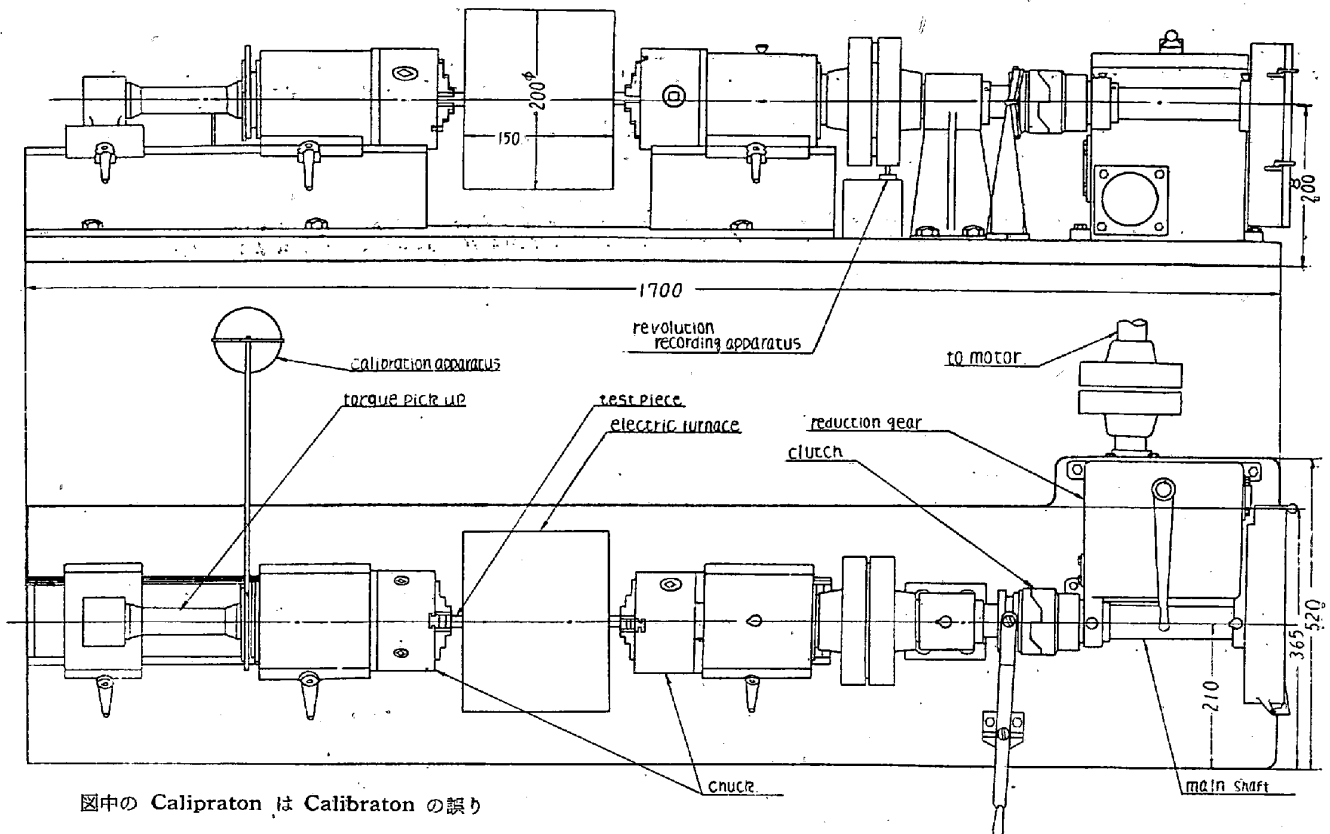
Skeleton diagram of the hot torsion testing machine.
